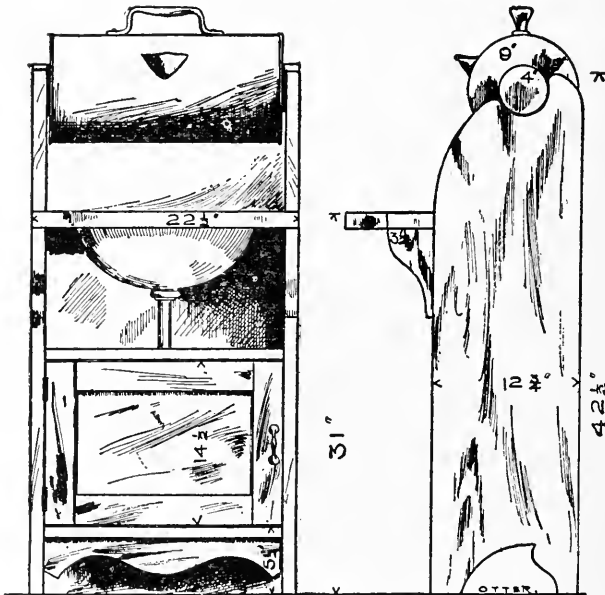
Front Elevation and Side View of Portable Wash Stand.
